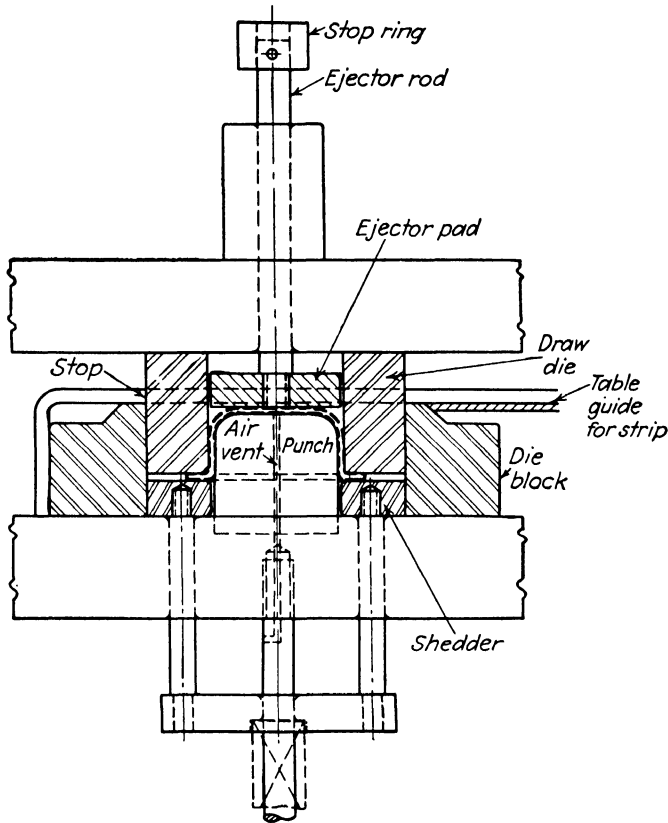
Low-cost blanking and drawing die for rapidly producing flanged shells by cutting them consecutively from a strip.
